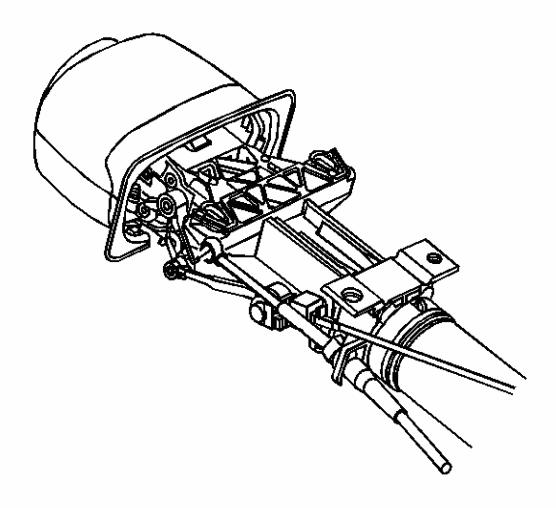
View of Shift Lever Cable and Linear Shift Assembly Courtesy of GENERAL MOTORS CORP.
